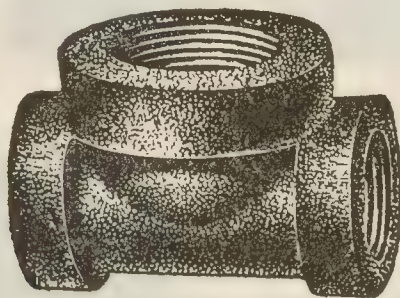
,886.—Cast iron *enlarging or "bull head" tee*, enlarging on side outlet.
